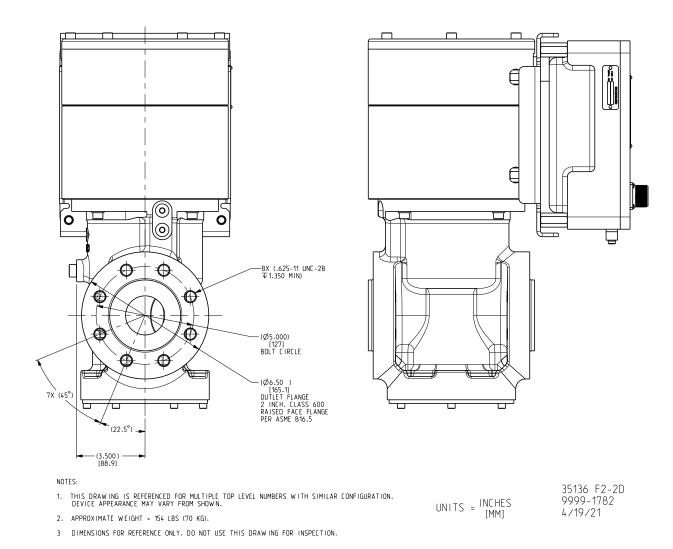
Outline Drawing Stainless Steel GS50 with Connectors
